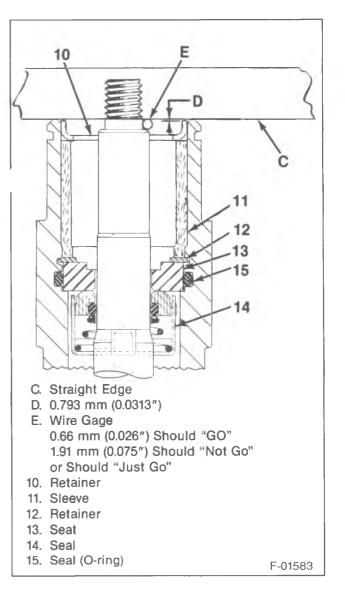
Shaft and Seal Position and Correct Position Gaging Guide
